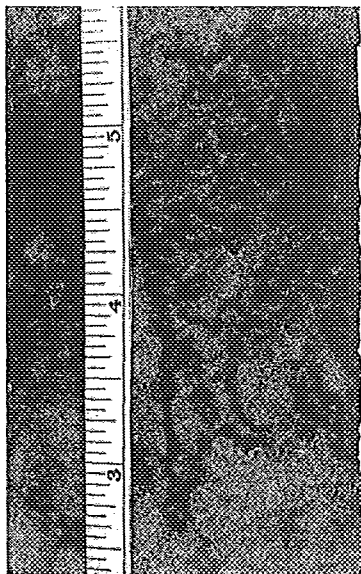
Bimetallic Corrosion Caused by Mill Scale on Steel Tubing
